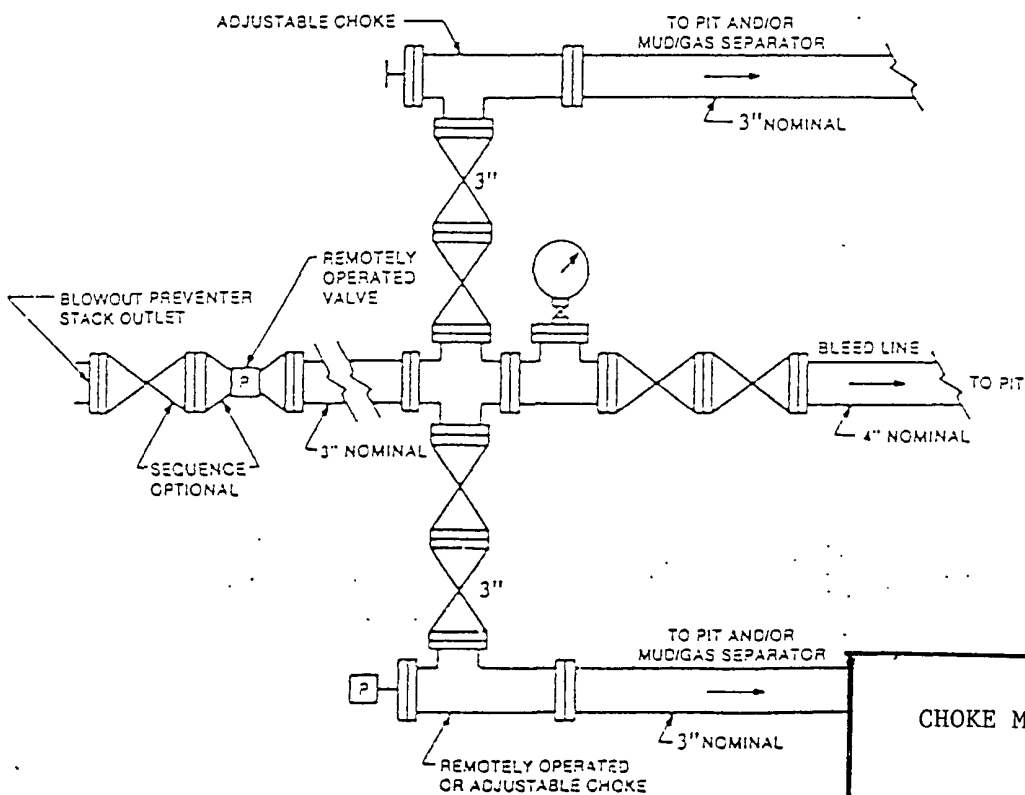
Typical choke manifold assembly for 5M rated working pressure service — surface installation.
